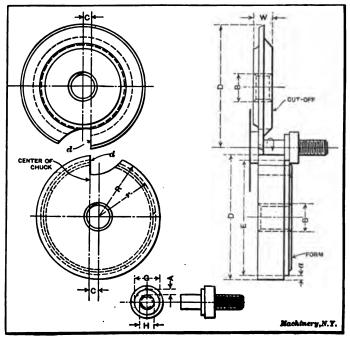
Diagram showing Principal Dimensions of Circular Form Tools
